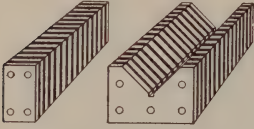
Examples of Karnetic parallels. (*Courtesy of Kar Engineering Company.*)
